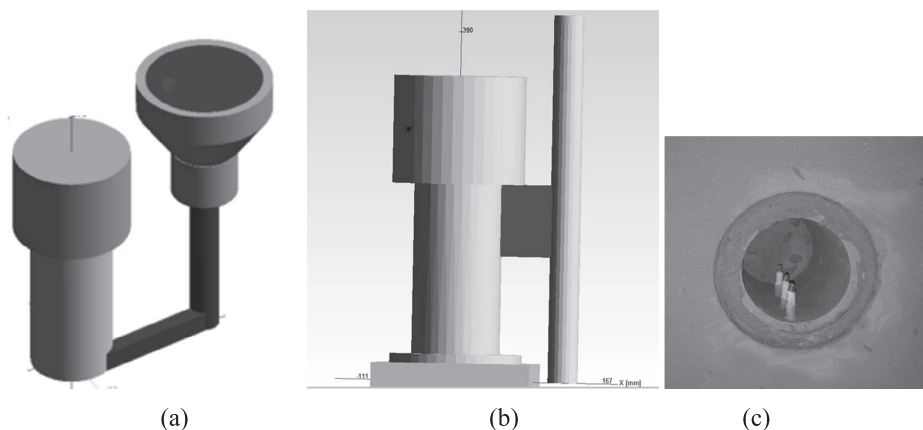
Experimental castings: (a) casting "A", (b) casting "C" with bottom chill, and (c) three thermocouples installed in casting "C" (top view).
